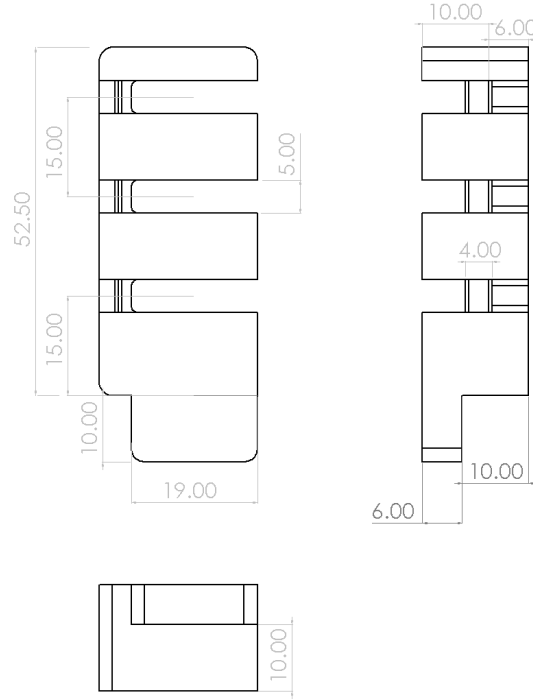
Technical drawing of a sample holder allowing rotation of samples about the instrument z -axis. All dimensions are in millimeters.
